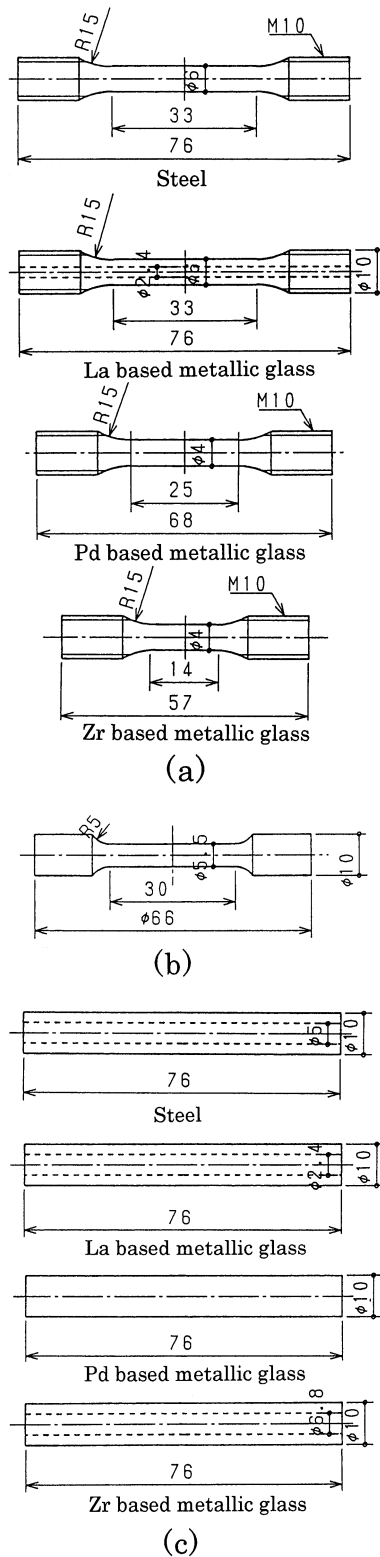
Shape and dimensions of the test specimens for (a) tensile, (b) torsional rupture and (c) torsional tests.
